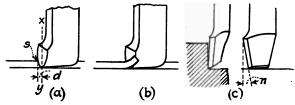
Cutting action of tool when machining a plane surface. Note in view (a) that line xy is parallel to the base of the tool and therefore the tool has no front rake. Note also that since the cutting edge is given side rake, the start of the cut is made at s and the distance d is traversed before the full depth of the cut is taken; thus the tool enters the work gradually and prevents the shock of the full cutting edge striking the metal at once. The way in which the chip curves is shown in (b). In (c) is shown a side tool with the cutting edge ground flat to take a finishing cut, say a quarter of an inch or more wide. Note the angle of shear n to give an easy start and finish of the cut. A side tool ground in this way is much used in shaper and planer work for finishing cast iron.
